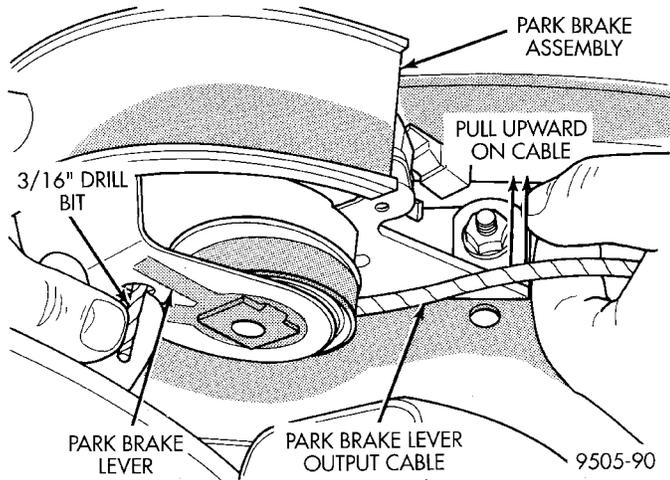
Locking Pin Installed In Park Brake Mechanism
